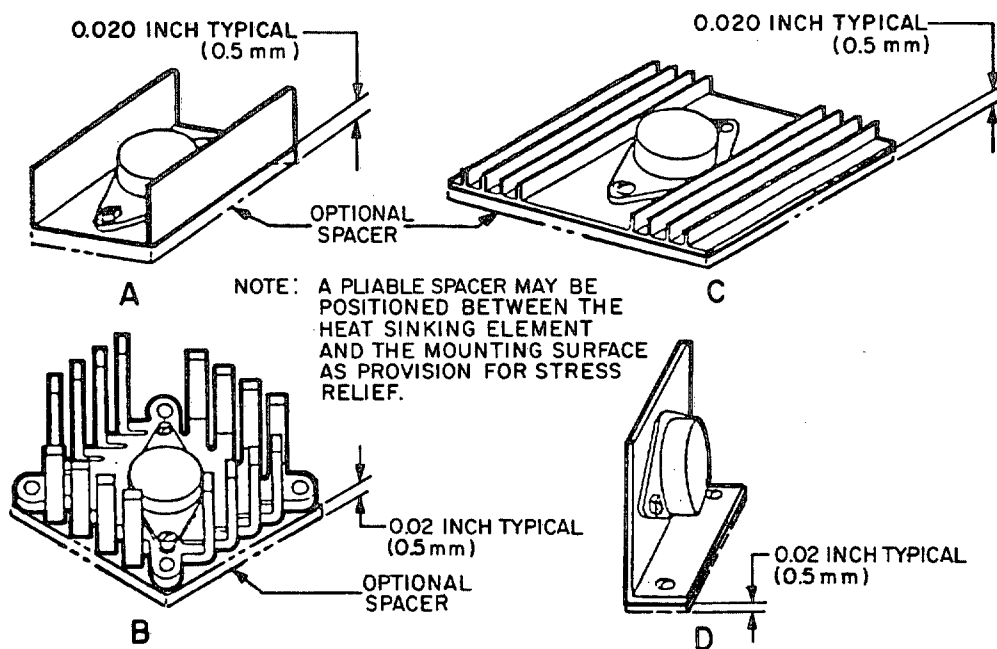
Heat sinked metal power packages (see 5.1.1.9.3).
